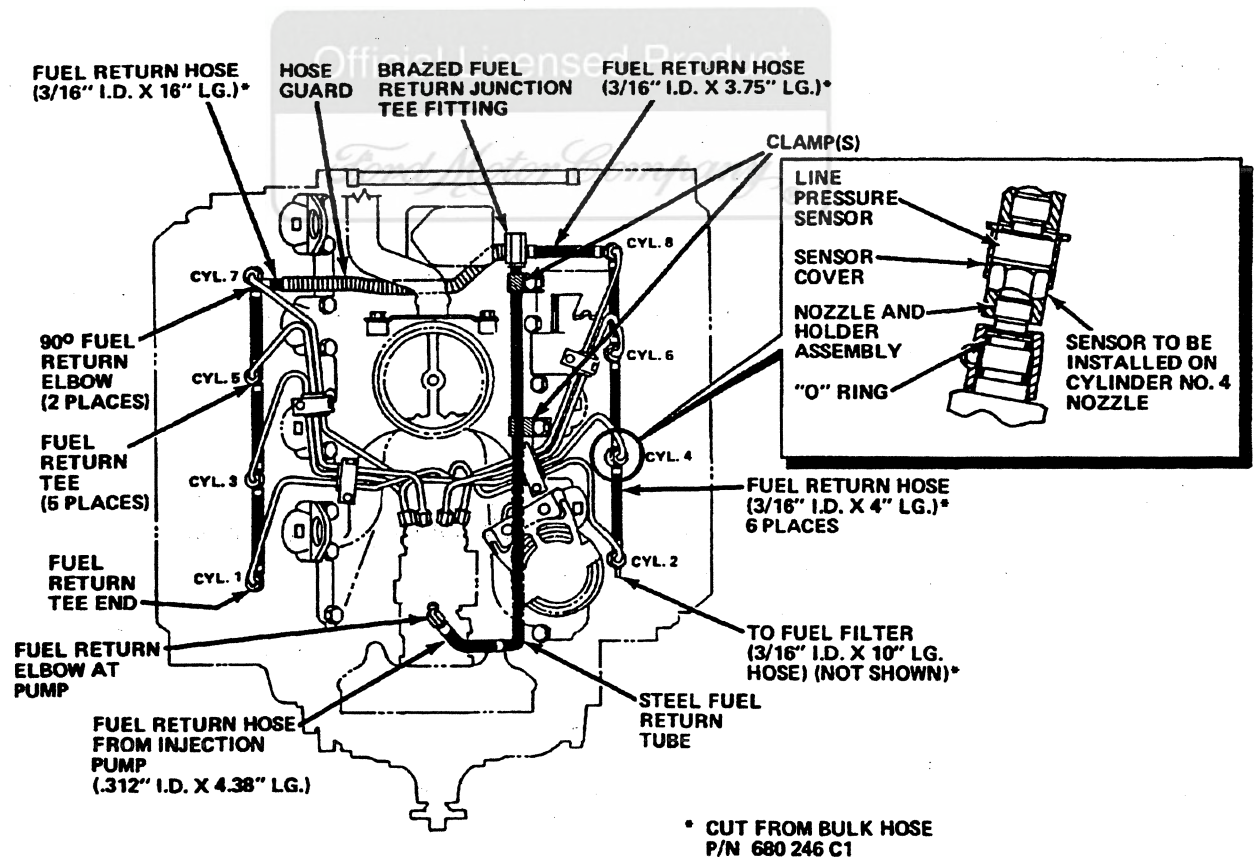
A. EARLY MODEL Fuel Return Line Routing and Installation
